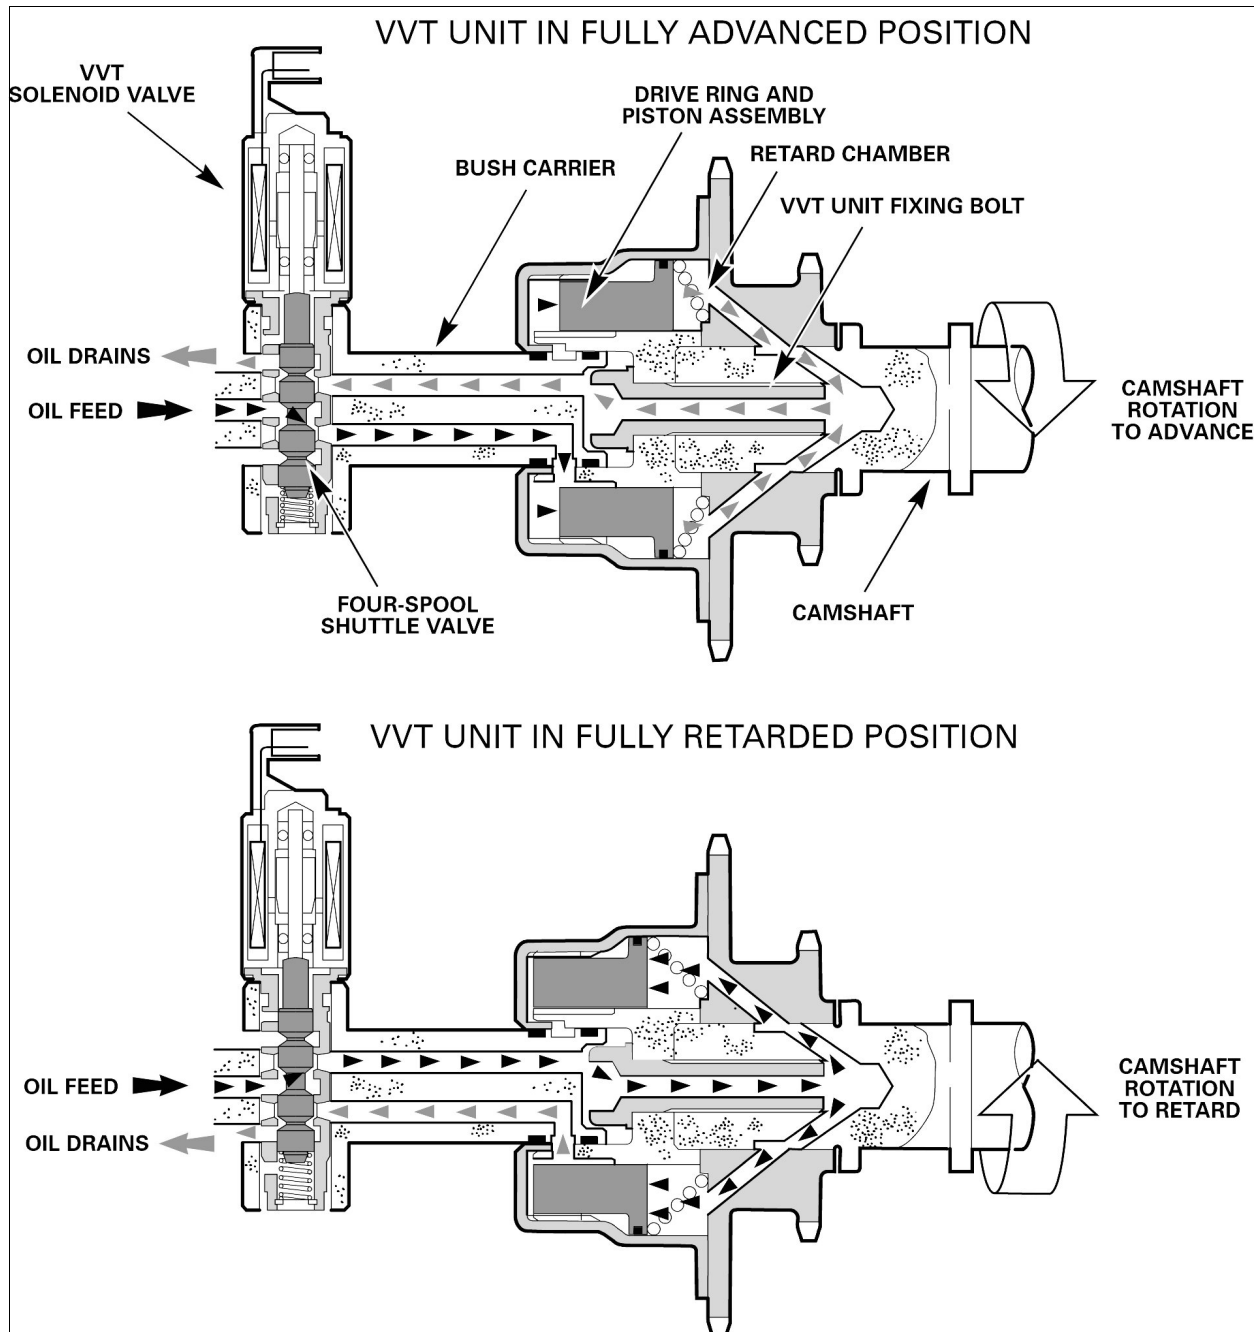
LINEAR VVT OIL CONTROL – AJ27
